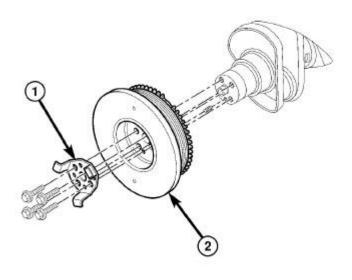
Crankshaft Damper (Non-High Output Engine) Courtesy of CHRYSLER GROUP, LLC
